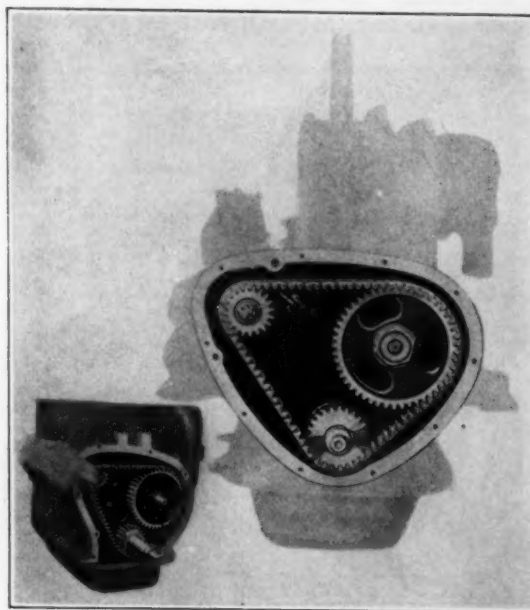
SPECIAL LAYOUT FOR CAMSHAFT AND GENERATOR
